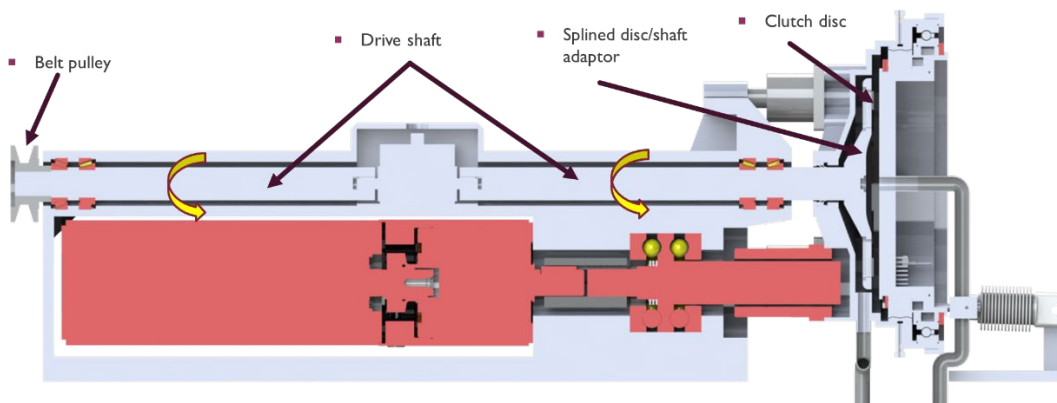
The rotating parts of the assembly from the belt pulley to the clutch disk
